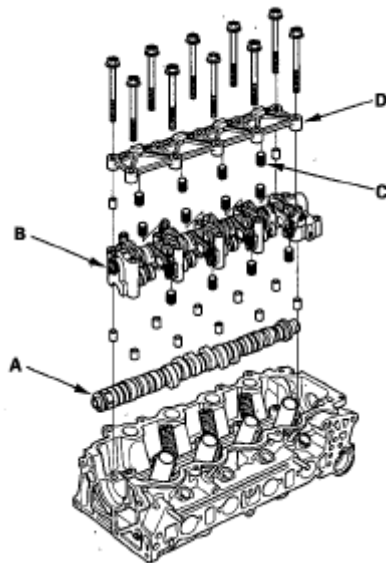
Locating Camshaft, Rocker Arm Assembly, Lost Motion Assembly & Lost Motion Holder
